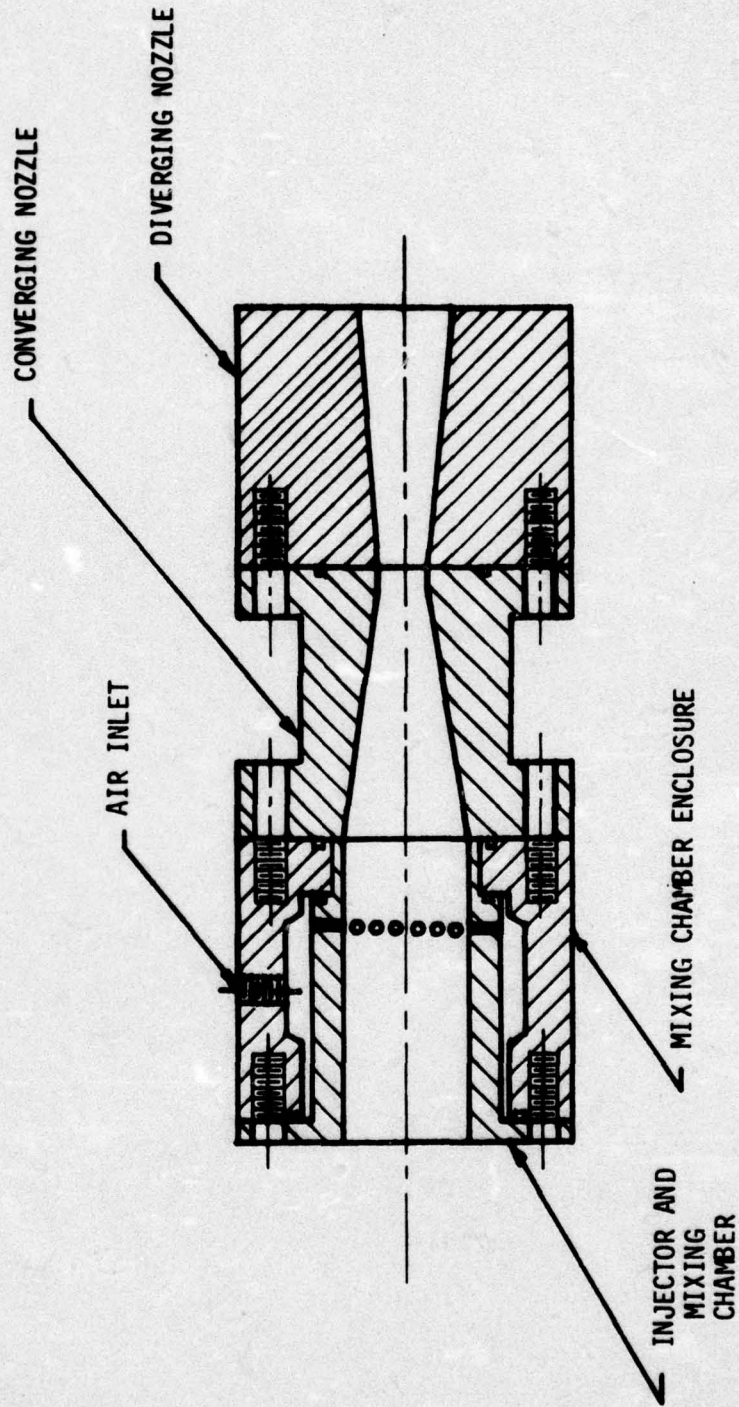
Cross-Sectional View of Mixing Chamber and Thrust Nozzle
